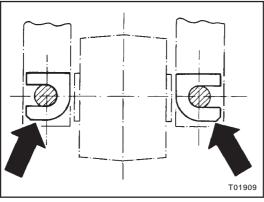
"Toe/camber" adjustment spacers must be orientated so that the openings are horizontal and to the outside
